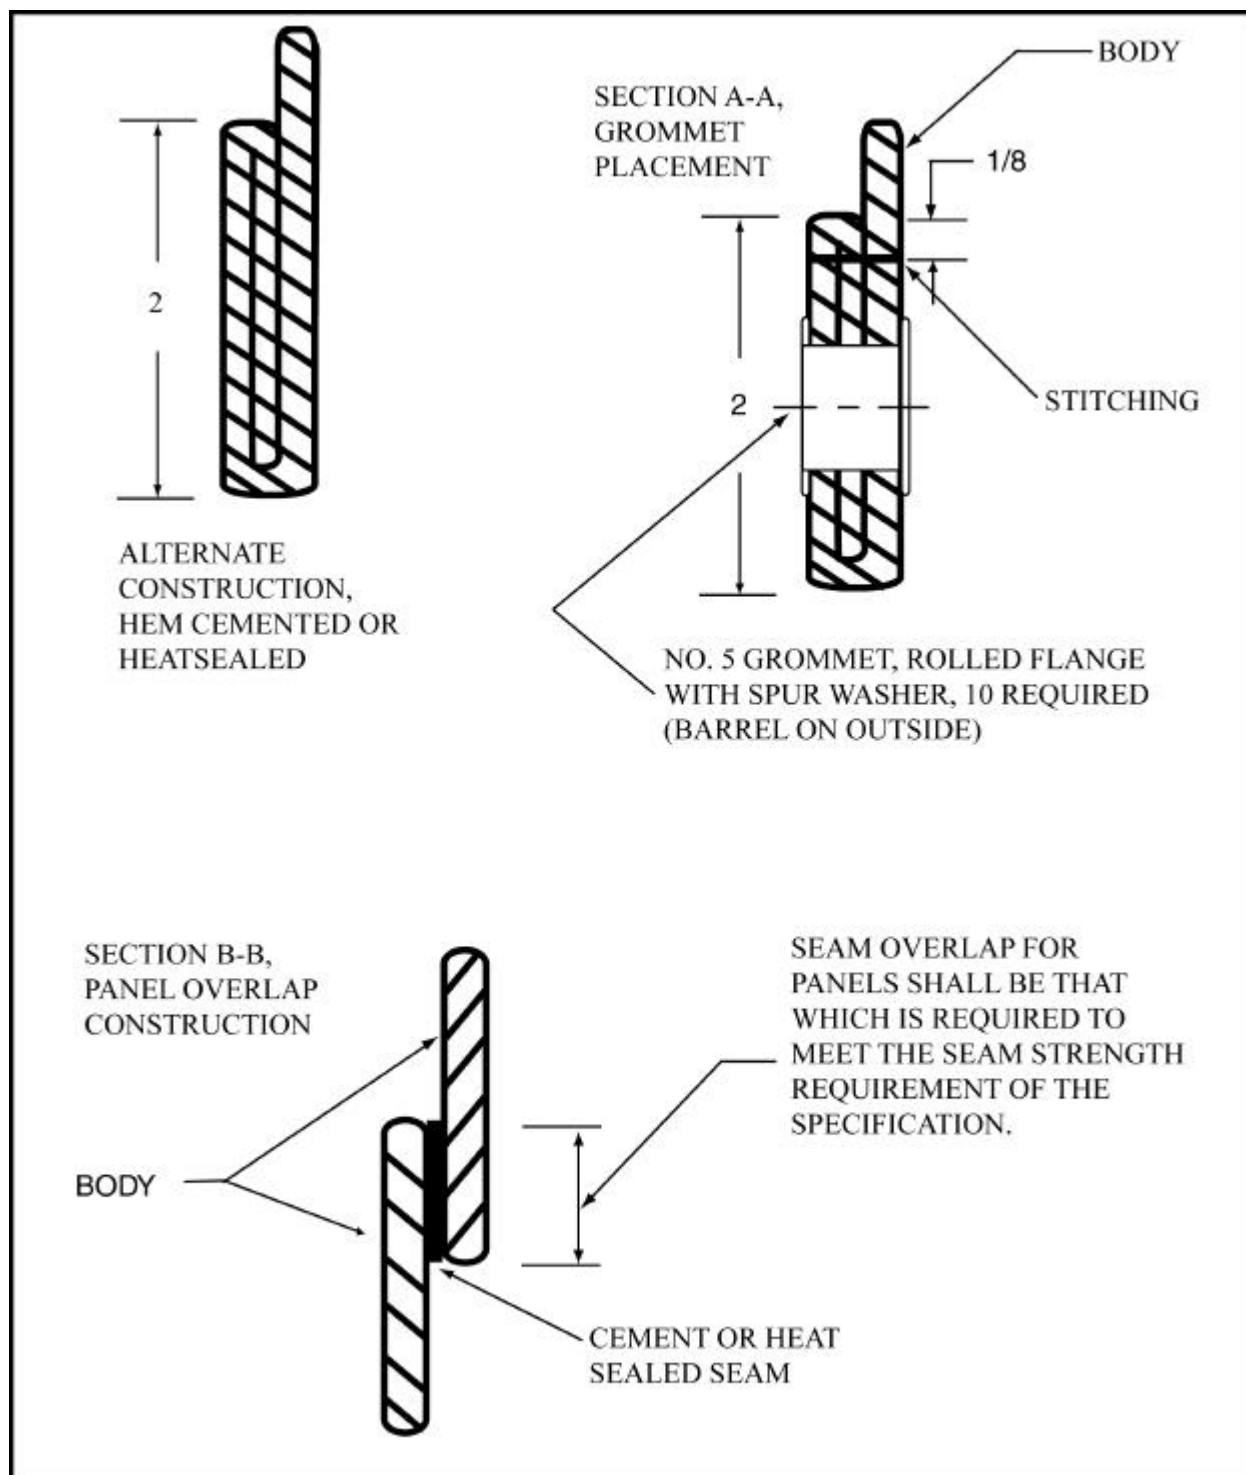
SECTIONAL VIEWS OF TARPAULIN
